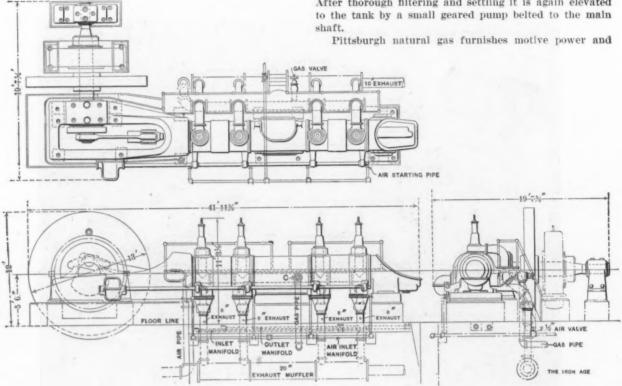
Plan and Elevations of the Four-Cylinder Double Acting 500 Horse-Power Westinghouse Gas Engine.
